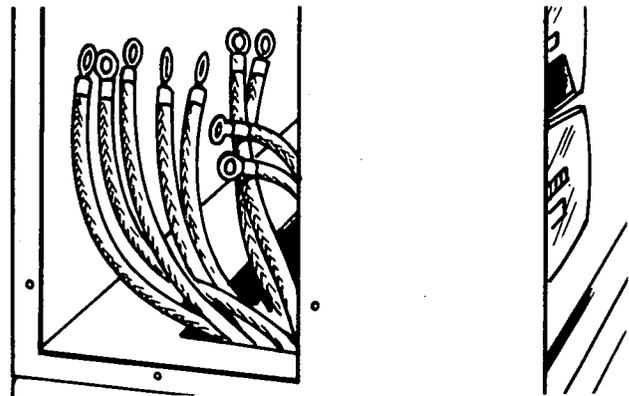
CONTROL BOX (SIDE PANEL REMOVED)
